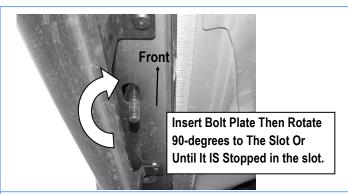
Passenger Side Front Mounting Location (on Pinch Weld)
